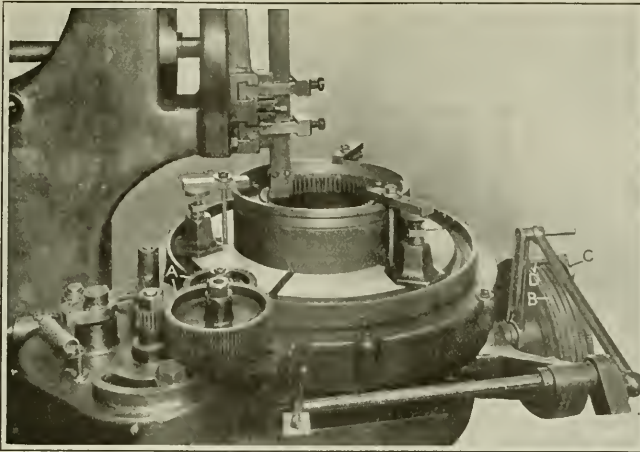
Internal Gear-cutting Operation on Automatic Machine of Slotter Type
